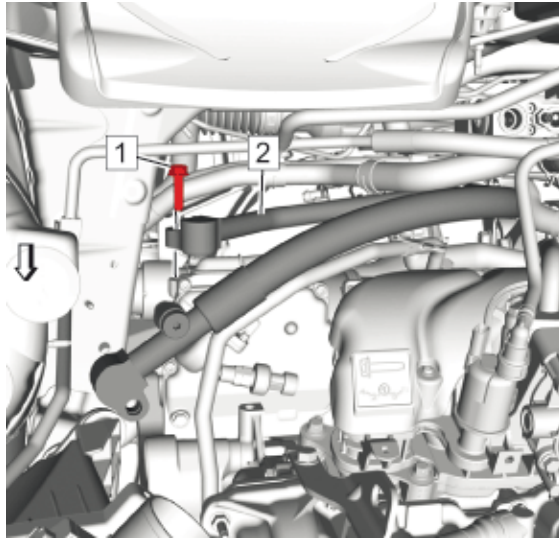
Air Conditioning Compressor Hose Bolt And Air Conditioning Evaporator Hose
